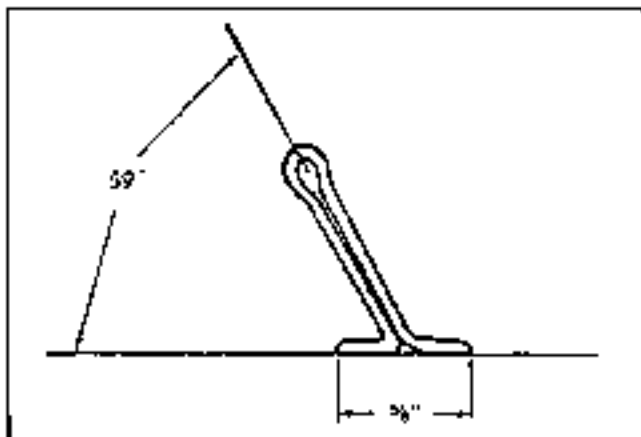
Tool For Removing Upper Half of Main Bearing
